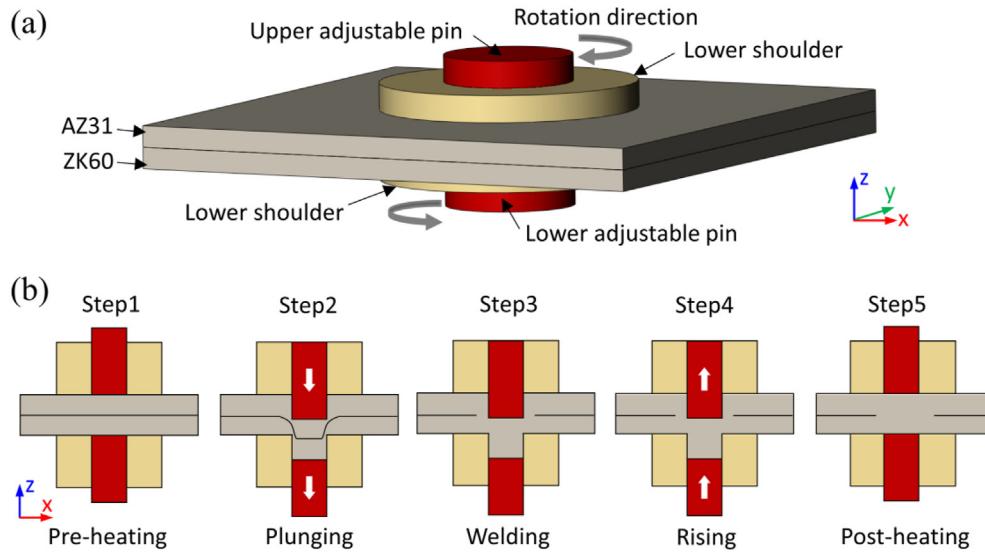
(a) Diagram of the Flat DSAT FSSW system; (b) Schematic sketch of the welding process.
